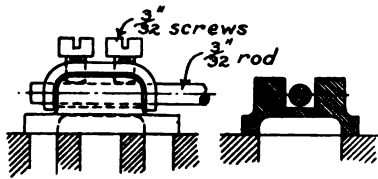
TWO VIEWS OF SLIDE VALVE. (Full size.)
